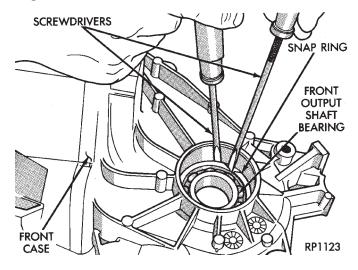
Removing/Installing Front Output Shaft Bearing Snap Ring
